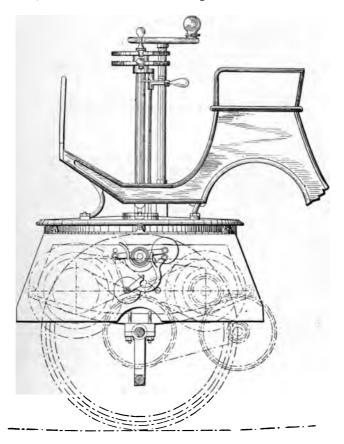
Kühlstein-Vollmer petrol cab—side elevation of fore-carriage.
